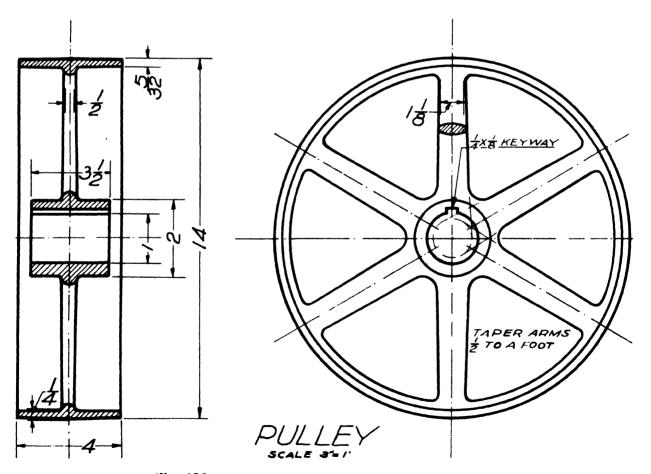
A FULL SECTION AND A REVOLVED SECTION
